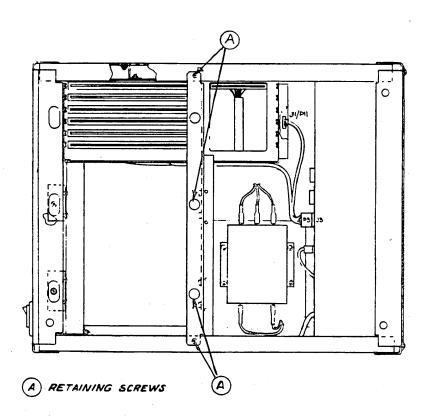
Top Angle Bracket Retaining Screw Locations
